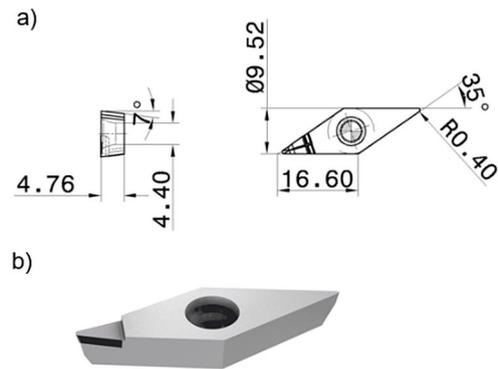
Cutting insert VCGT 160404: a) dimensions, b) photo
